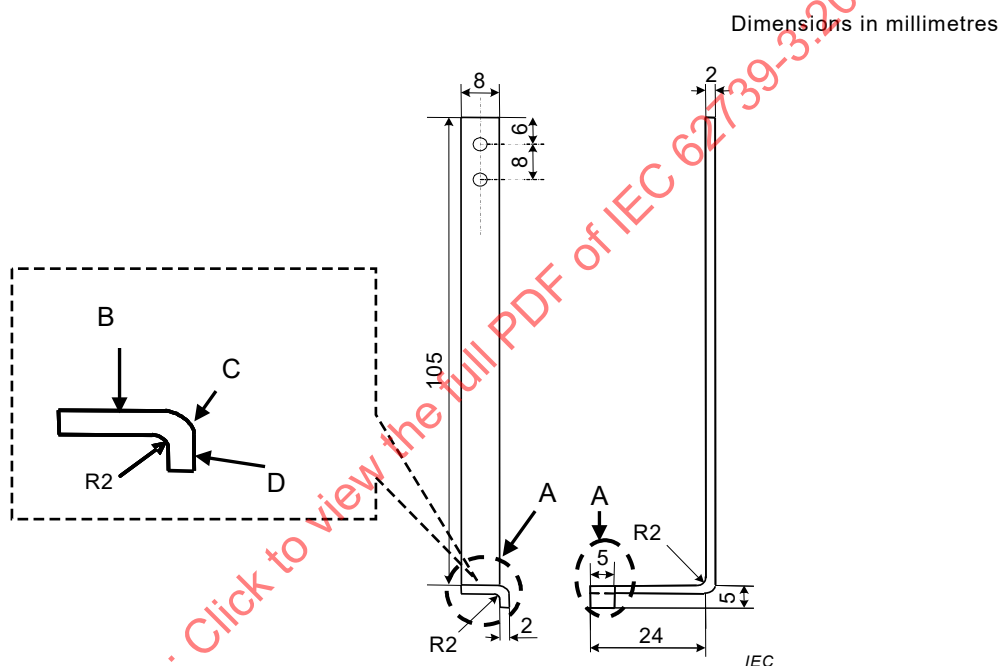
Configuration example of test equipment for rotation test at 450 °C with 2 mm bending
